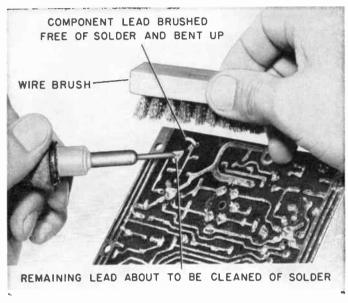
All excess solder should be carefully brushed away. (Admiral Corp.)
